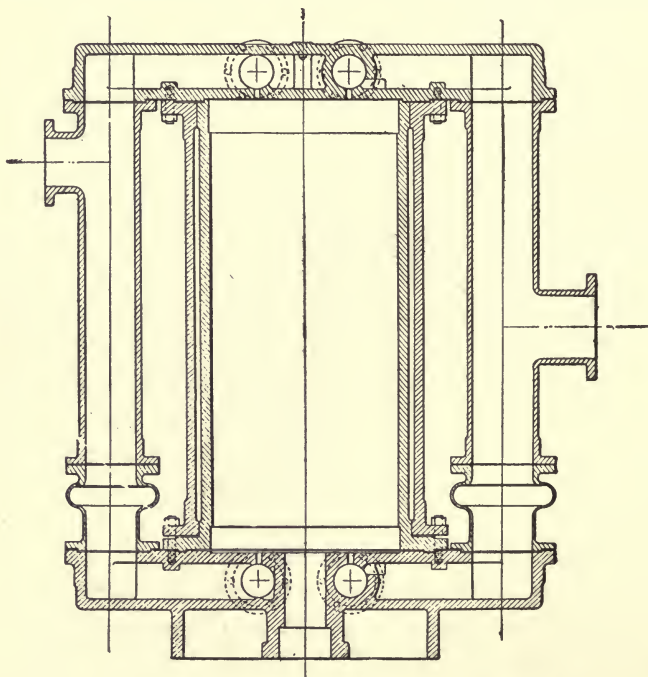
Section of Steam Cylinder with Side Pipes.
